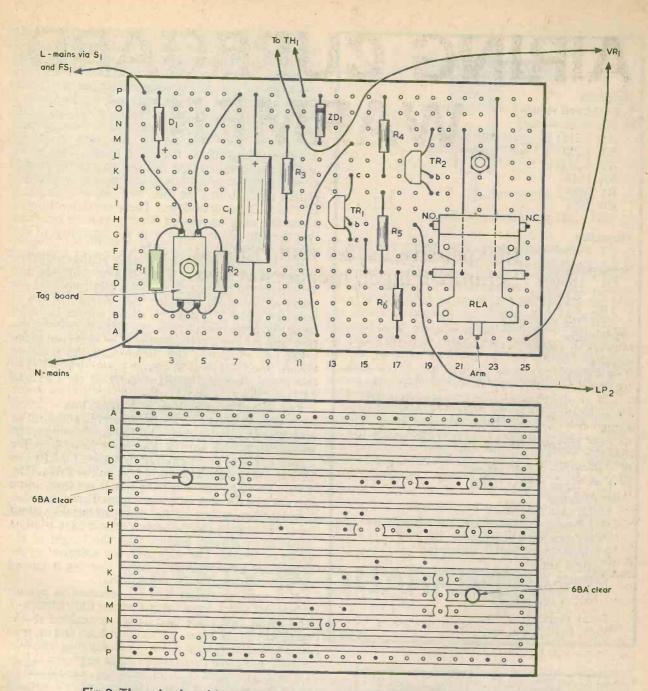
The relay is soldered directly to the Veroboard panel, as also are most of the other components. Veropins suitable for 0.15in. Veroboard are employed at the connection points to parts external to the board. Fig.1 should be followed for circuit details not shown here.
